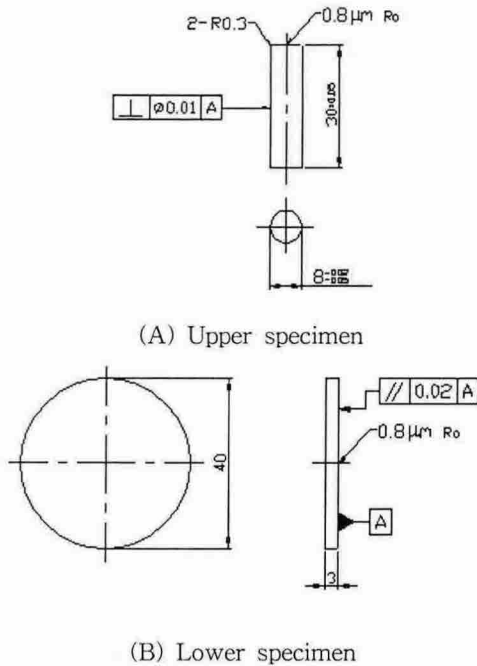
Configuration and dimension of upper and lower specimen for wear-corrosion
